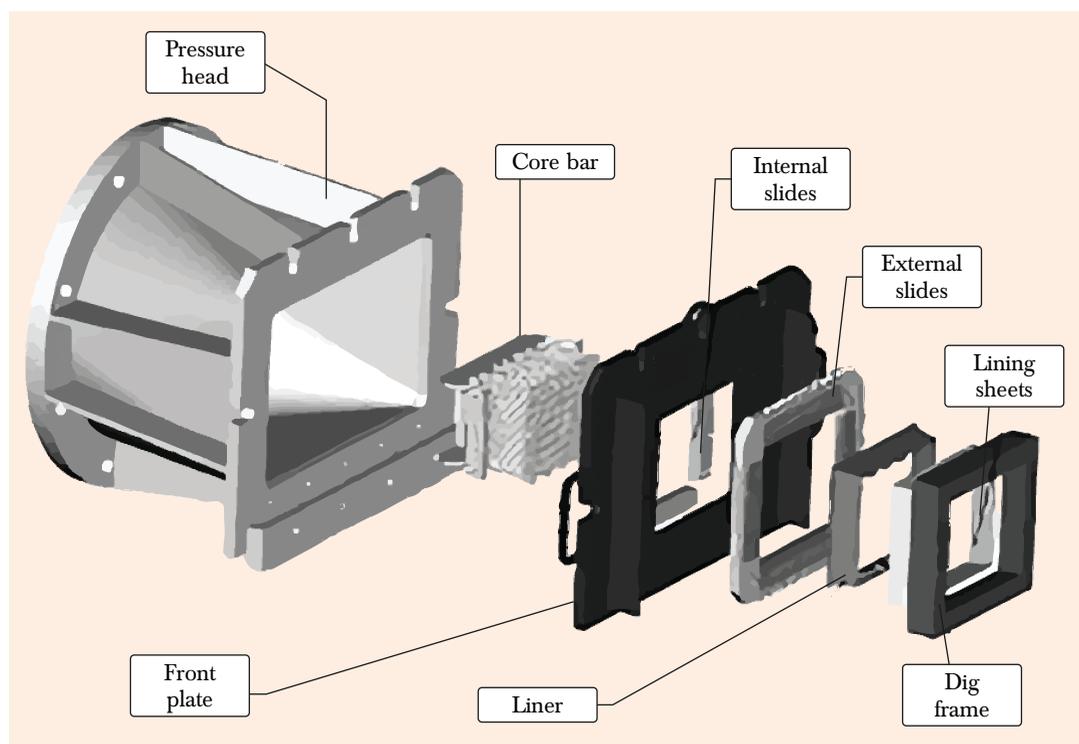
Standard combination of pressure head and die assembly for soft extrusion
